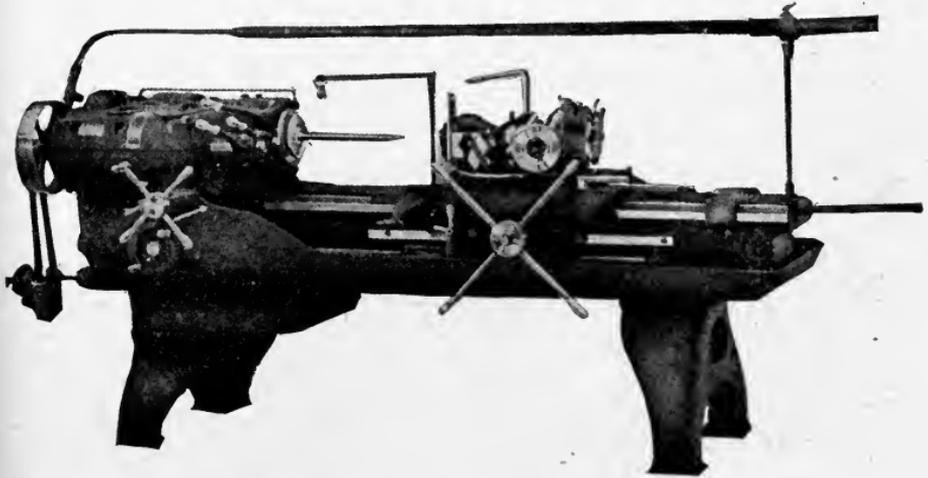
Flat Turret Lathe, with Special Tools Bolted to Top of Flat Plate
